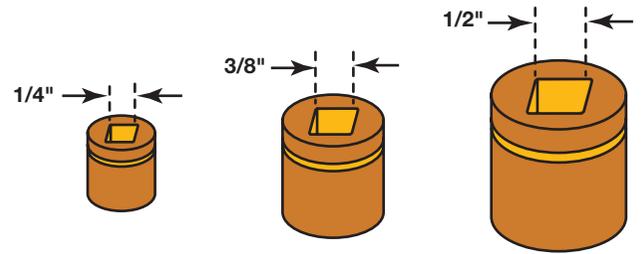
The most commonly used socket drive sizes include 1/4, 3/8, and 1/2 inch drive.
